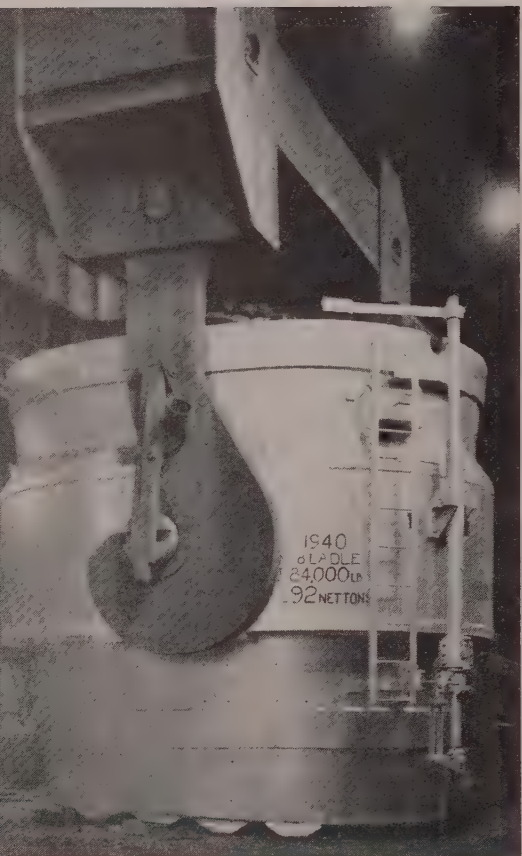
Close up of 200-ton capacity welded steel ladle showing heavy ladle bails, safety check arm, safety ladder and stopper rod mechanism
